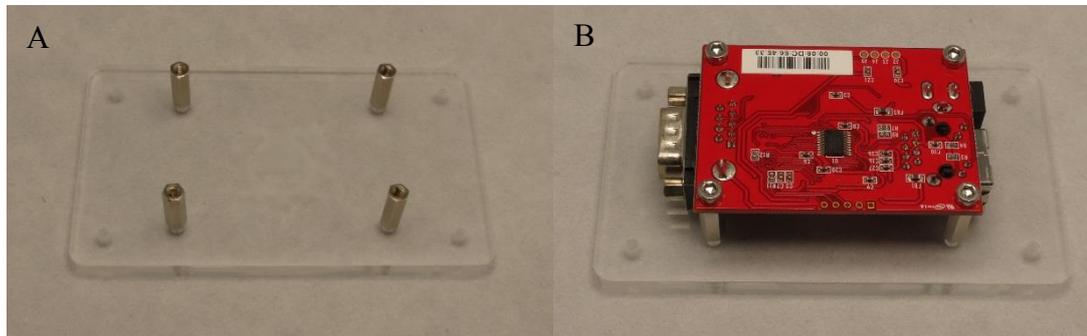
(A) 15 mm PCB spacers were screwed in the mounting panel and (B) the Ethernet-to-serial board was mounted.
